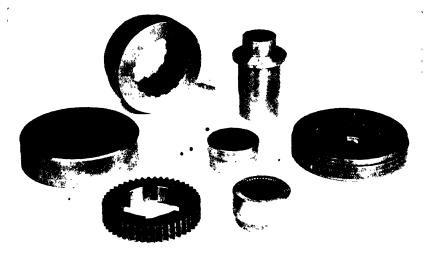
EXAMPLES OF INTERNAL BROACHING
